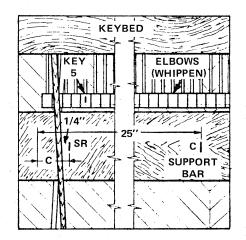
Measure dimension C and mark the Support Bar.
